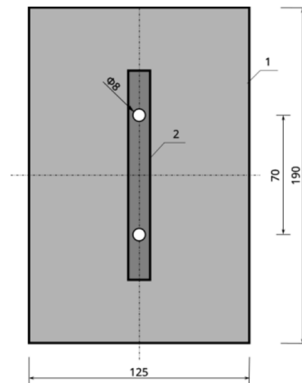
Working element for M&M trowels, size 190x125 mm, 1 – surface of the working element, 2 – mounting
